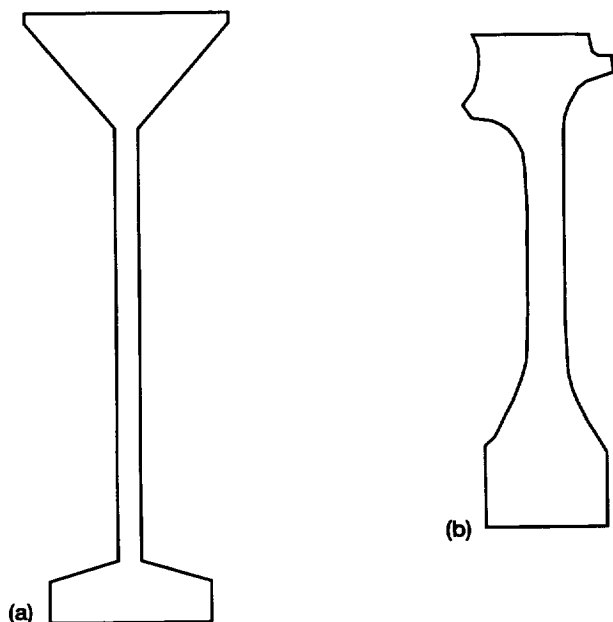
Third-stage rotating disk of E³ high-pressure compressor. (a) Design optimization program code. (b) E³ drawing.
